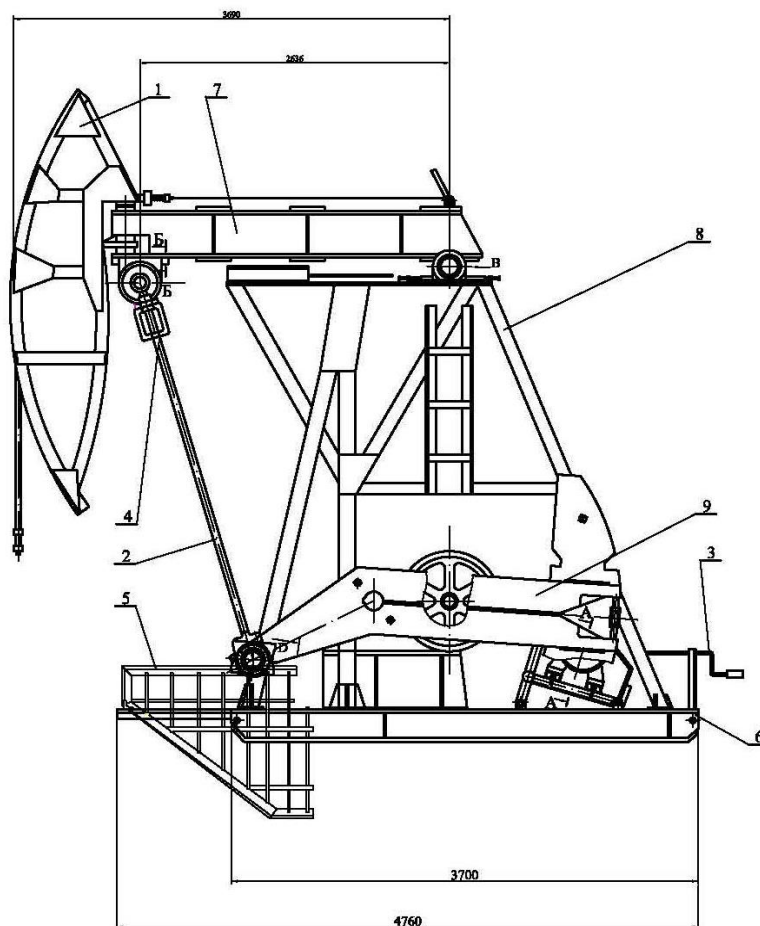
One-arm pump jack: 1 – balancer head; 2 – connecting rod; 3 – brake; 4 – traverse with a support; 5 – fence; 6 – frame; 7 – balancer with support; 8 – rack; 9 – crank with counterweights
